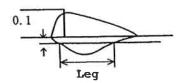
Leg in Lap Fillet Weld (Unit: mm)
